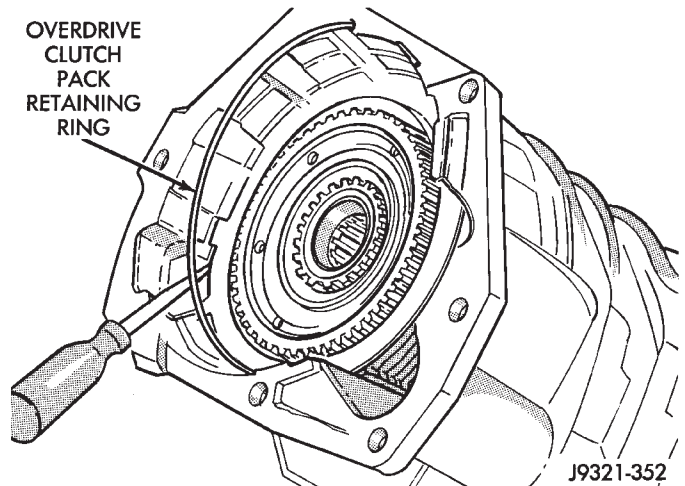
Removing Overdrive Clutch Pack Retaining Ring
